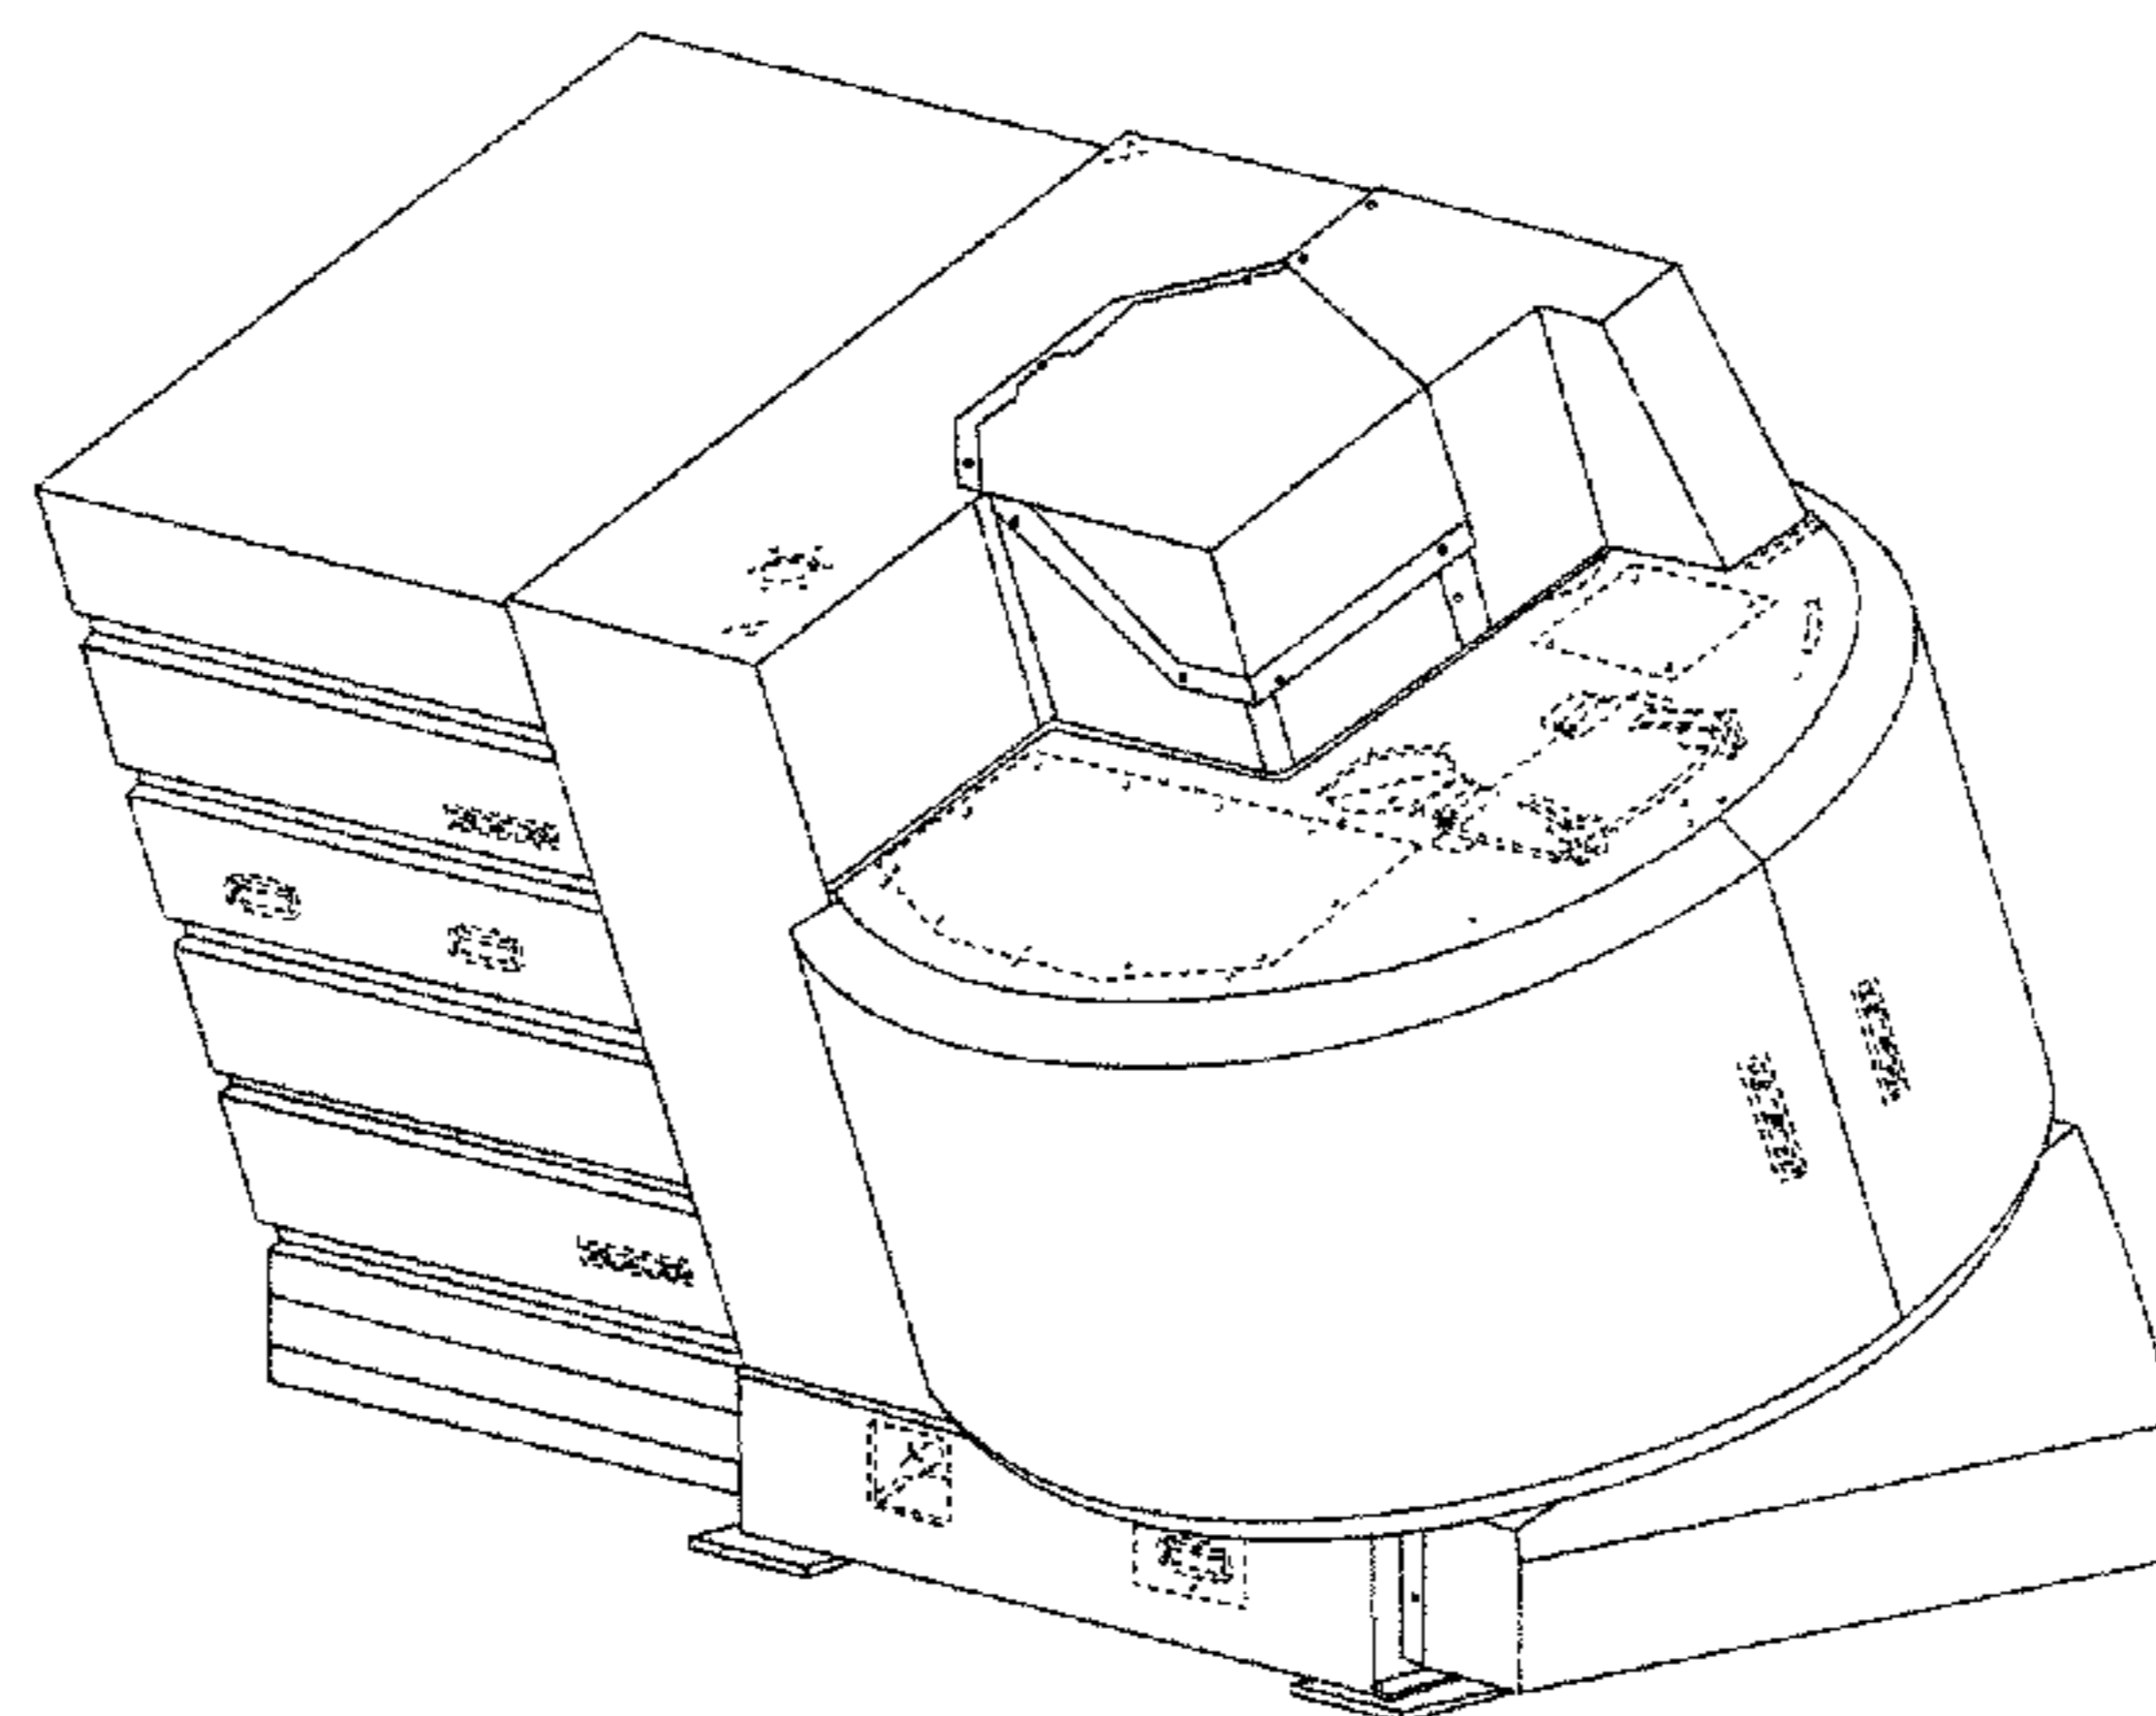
is a left side view of the mixing machine of FIG. 1.
